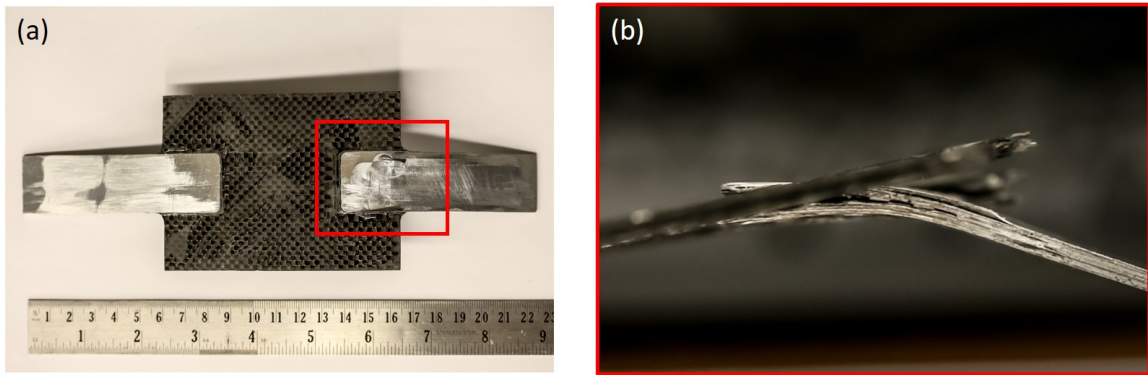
(a) Damaged UAM CF-Al joint. (b) Detail of UAM CF-Al joint damage.
